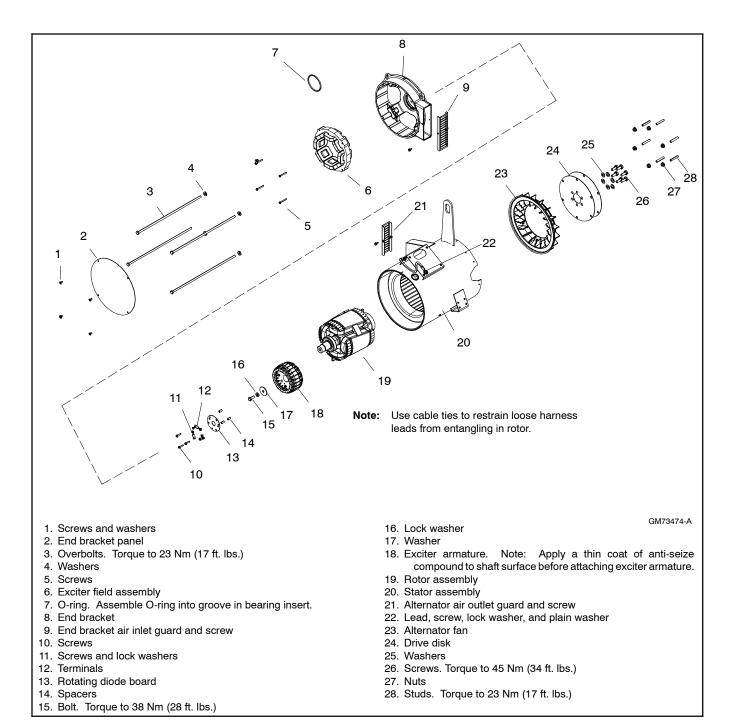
9-11EKOZD/7-9EFKOZD Alternator Assembly (Disassembly)
